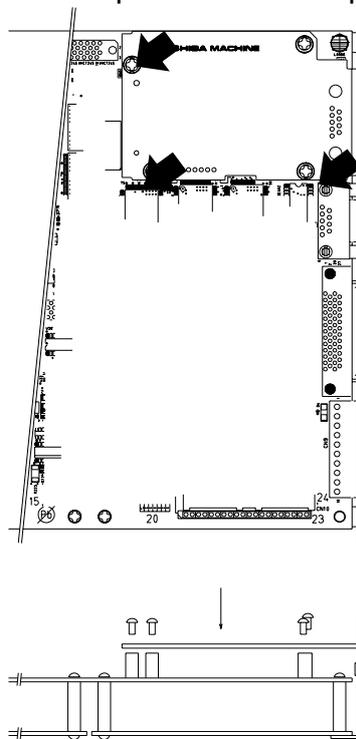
Top View and Side View of TS3000/TS3100 Controller (After Installation of Field Bus Printed Board)
